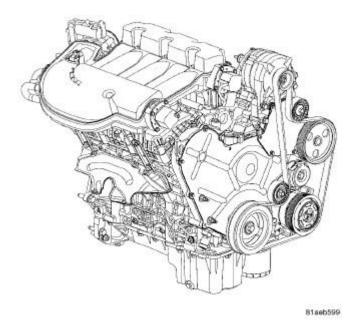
View Of 3.5L Engine Courtesy of CHRYSLER LLC
